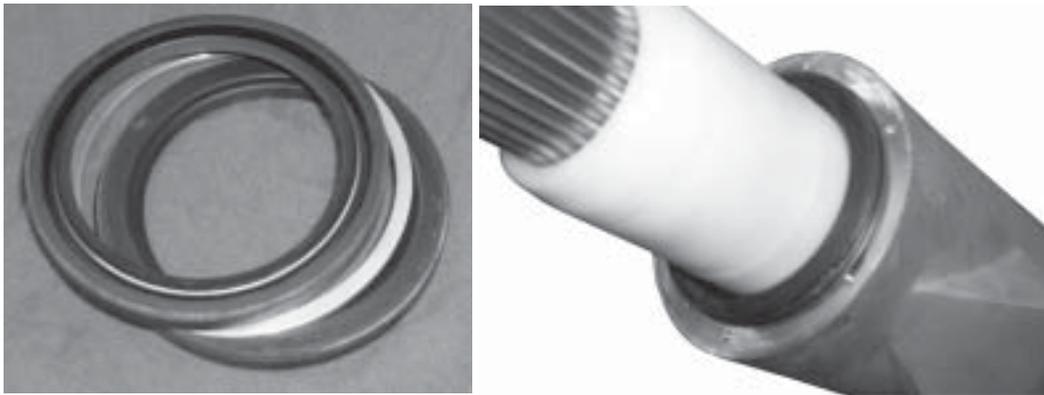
Seal Pack (left), Installing Inner Seal (right)
